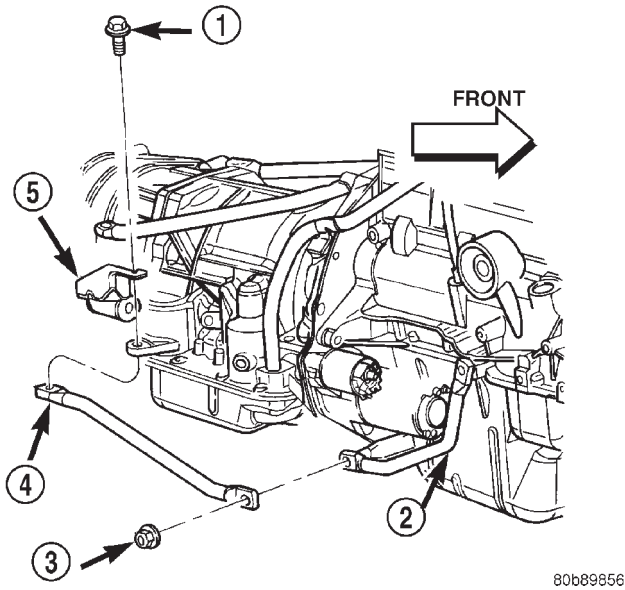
Transmission Bending Braces and Exhaust Hanger
